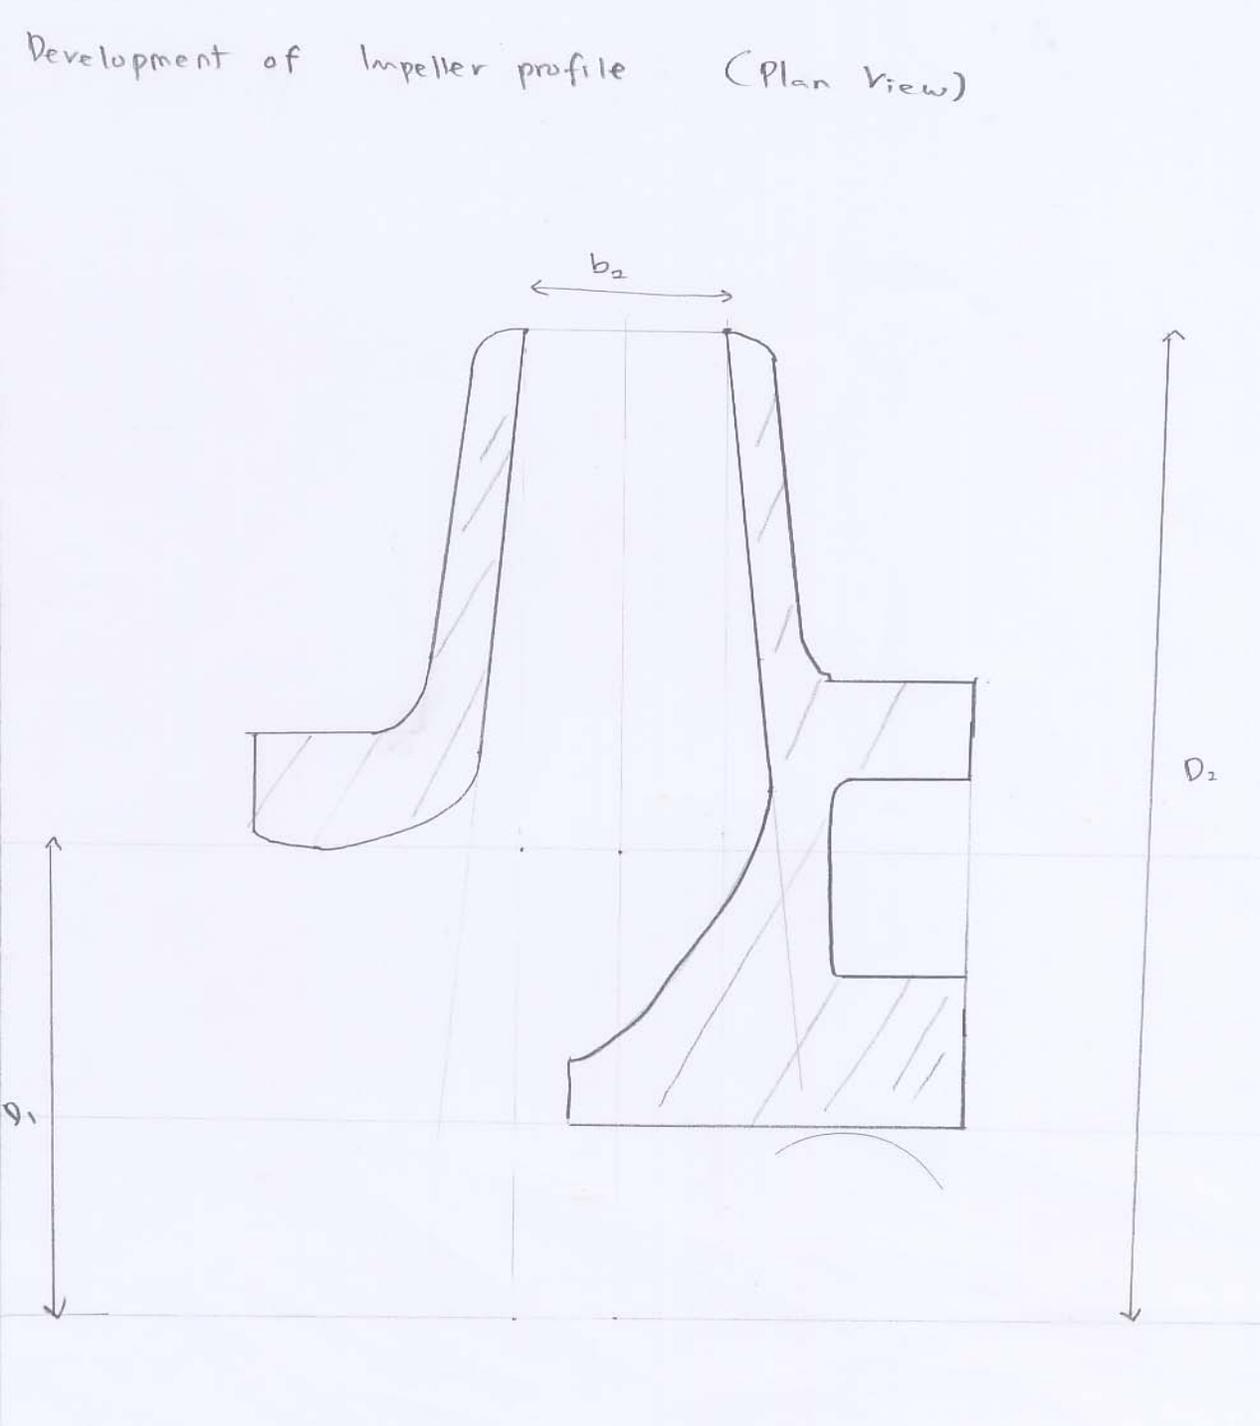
Impeller Layout (Plan View of Impeller Profile)
